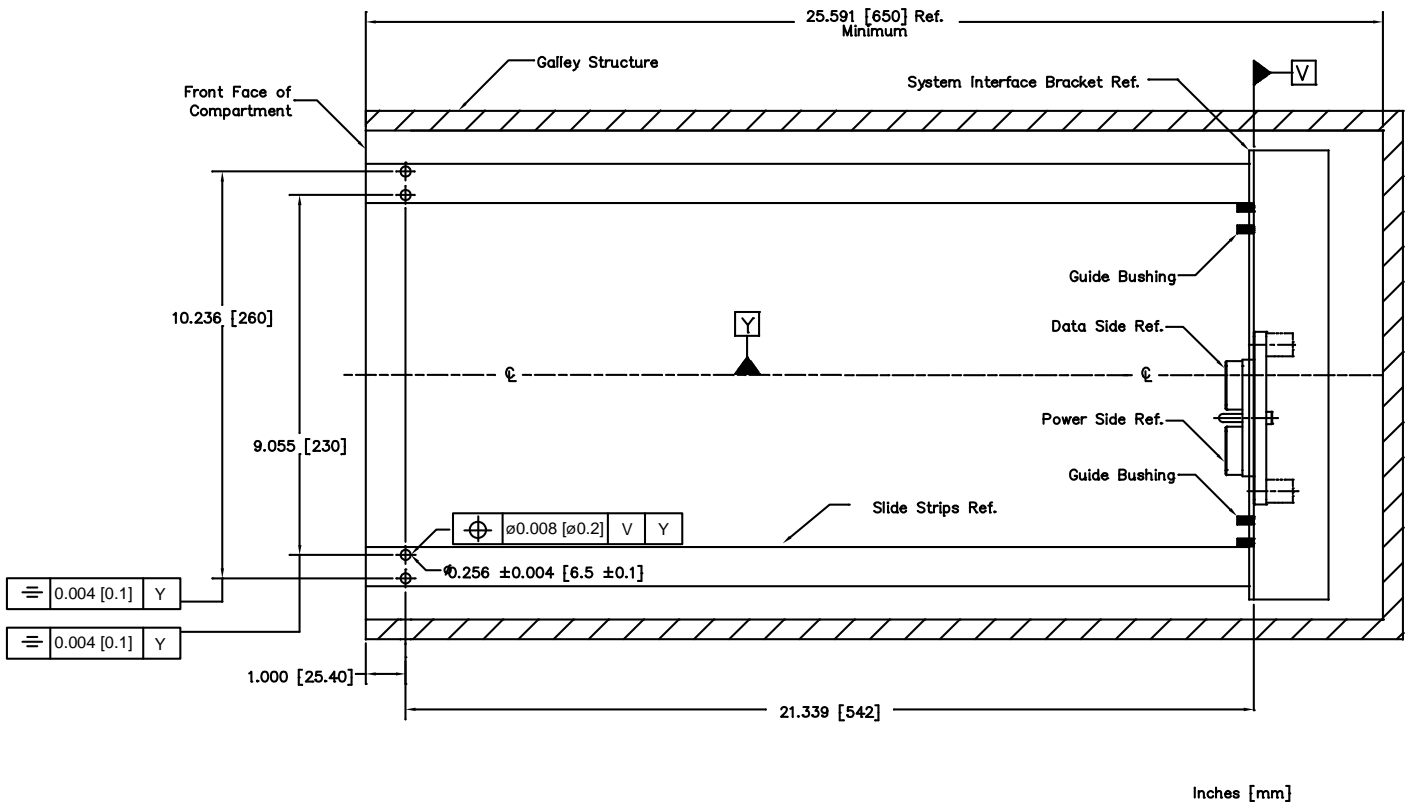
C – GAIN Size 4 Compartment Structural and Systems Interface Drawing – Plan View
